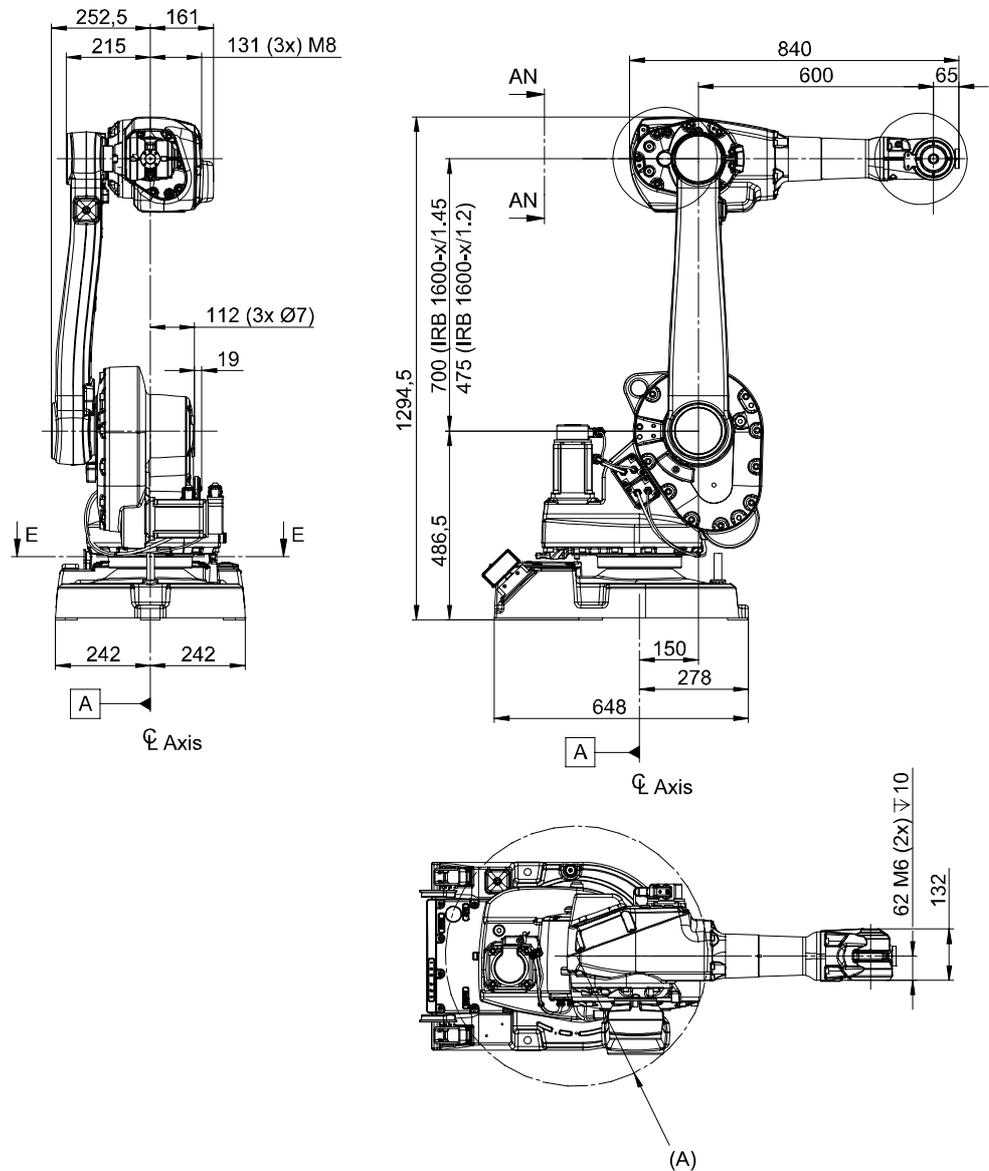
View of the manipulator from the back, side and above (dimensions in mm).
